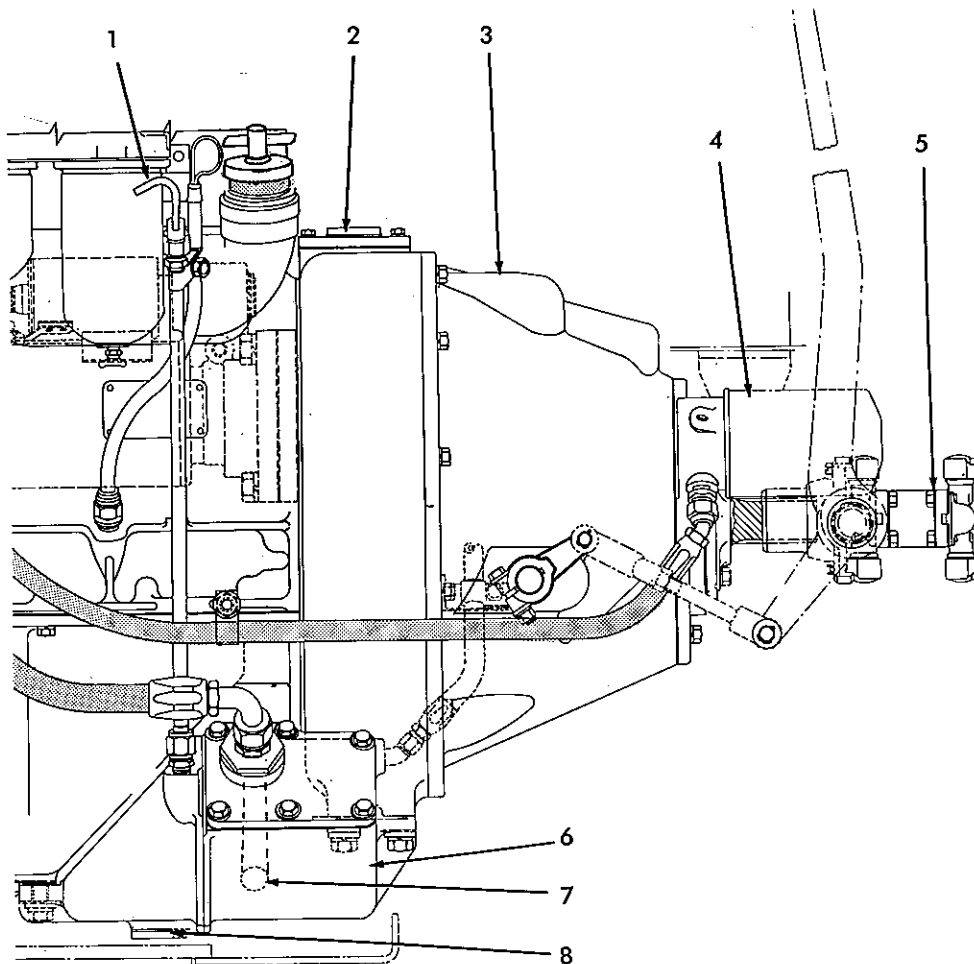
ENGINE CLUTCH (OIL-TYPE)
